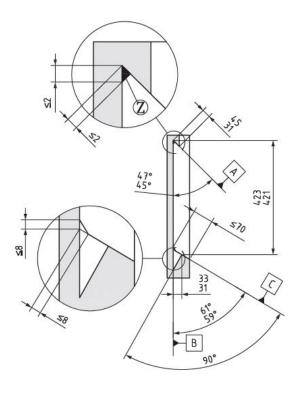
Sectional view of skid steer loader attachment geometry (Standards Australia 2021b, p. 7).
